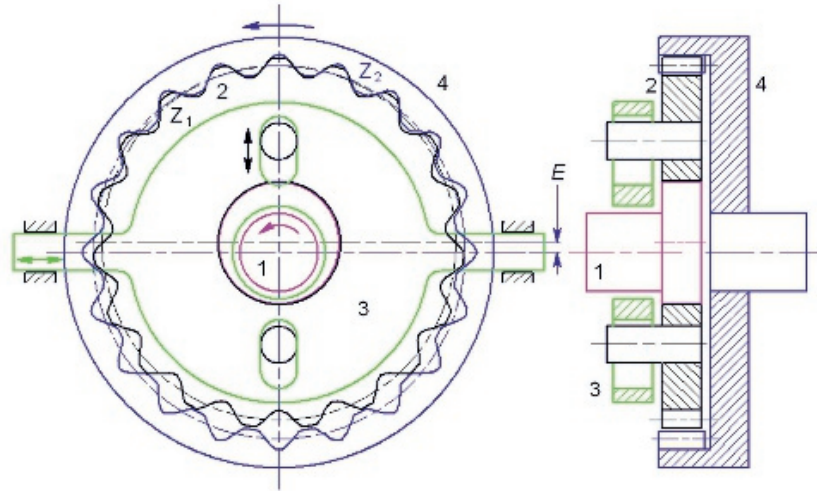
Arrangement with a wobbling planet gear; 1 – input shaft with the eccentric, 2 – planet gear, 3 – Oldham coupling plate, 4 – ring gear connected to the output shaft, E – eccentricity, gear center distance.
